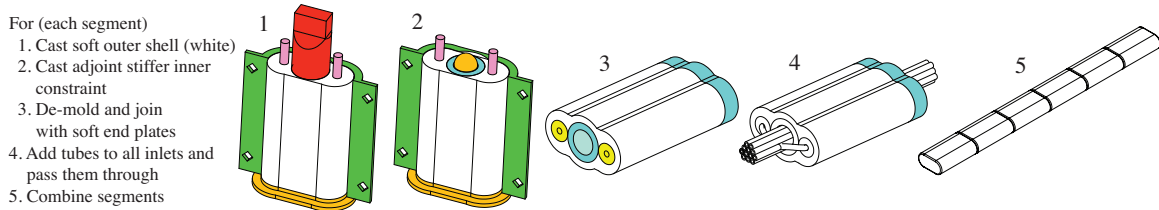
Retractable pin casting of a cylindrical manipulator morphology: Each body segment is cast using a two-step process: (1) the outer soft layer and (2) the inner stiffer layer are poured. (3) Once cured, the segments are joined to endplates using silicone adhesive. (4) Silicone tubing is connected to each embedded channel and the resulting bundle of tubes is run through the inside of each segment’s hollow interior. (5) The segments are serially connected using silicone adhesive to form a manipulator arm. The figure is adapted from Marchese et al. [2014a].
